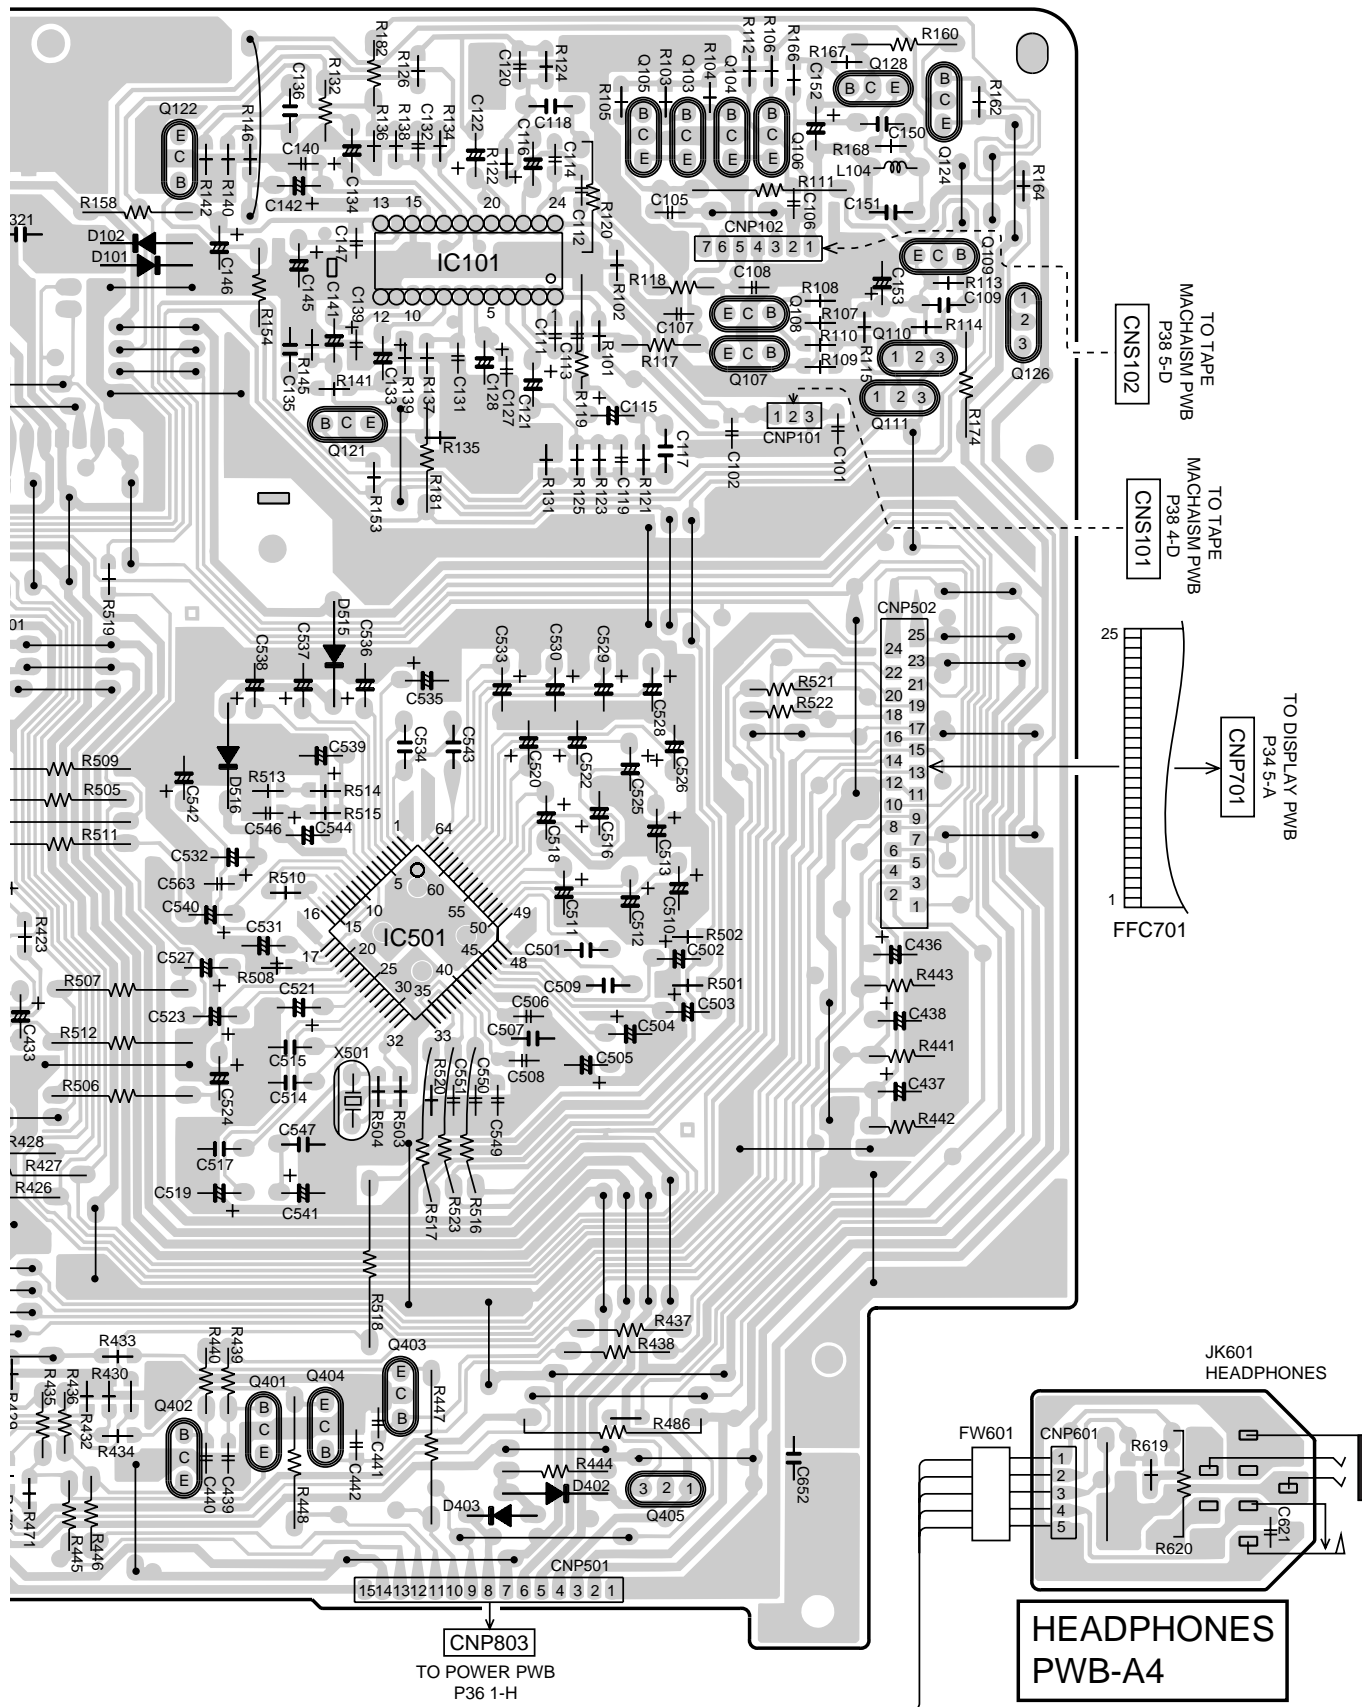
WIRING SIDE OF P.W.BOARD (2/8)
